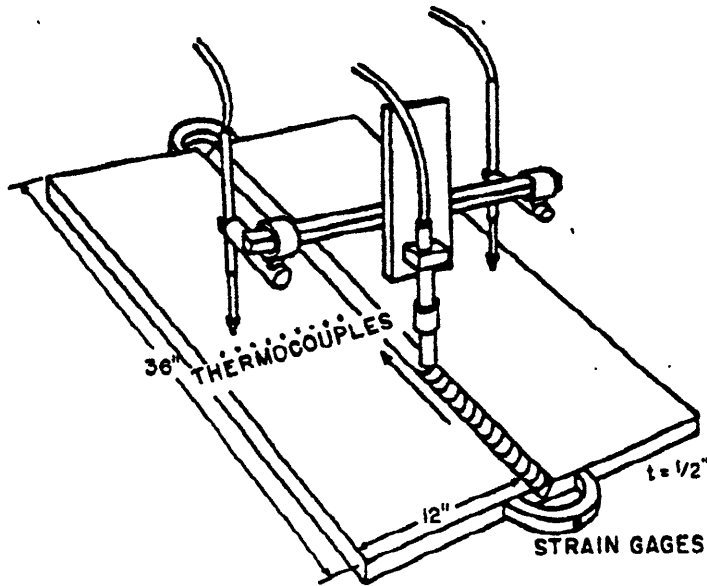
Formation mechanism of joint mismatch and a method of reducing it by side heating during welding[70]
